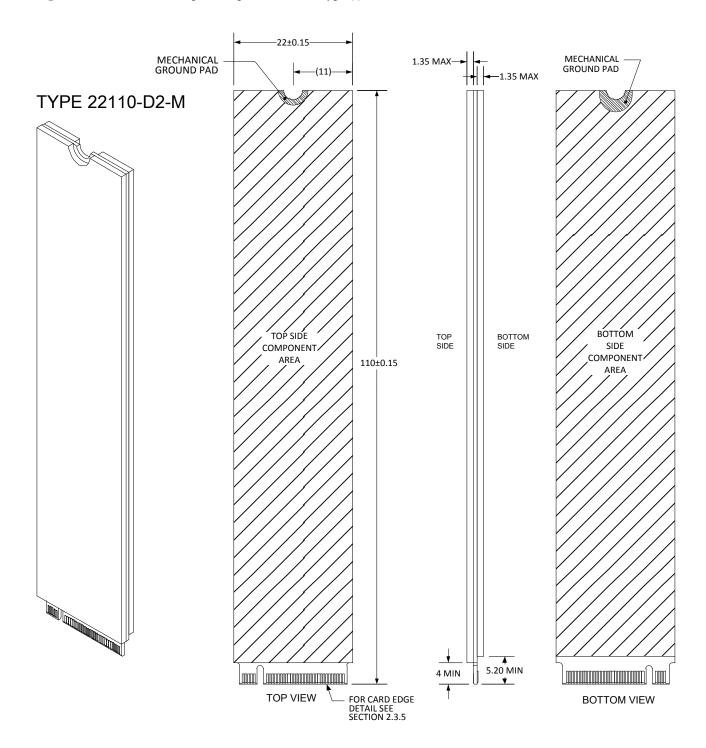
M.2 Type 22110-D2 Mechanical Outline Drawing Example
